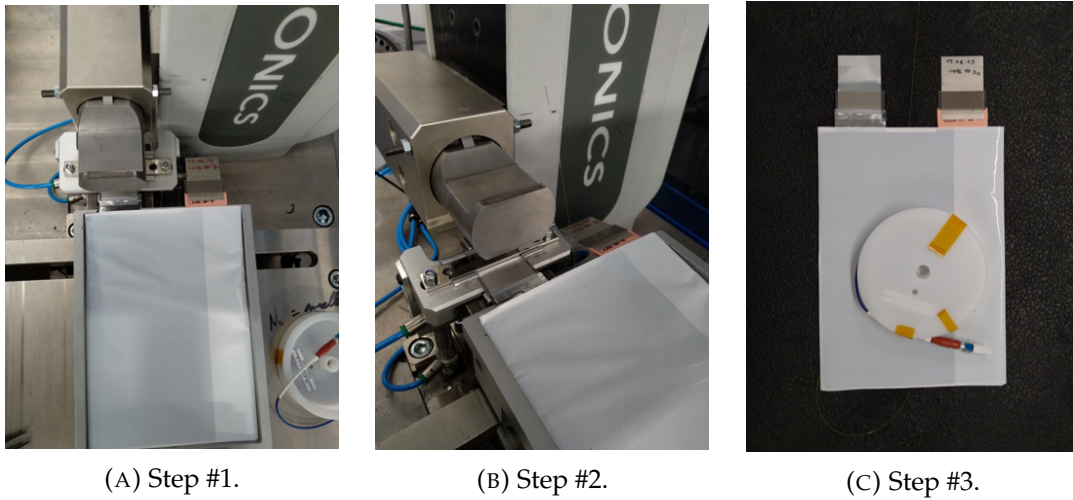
Instrumented pouch stack tabs welding.
